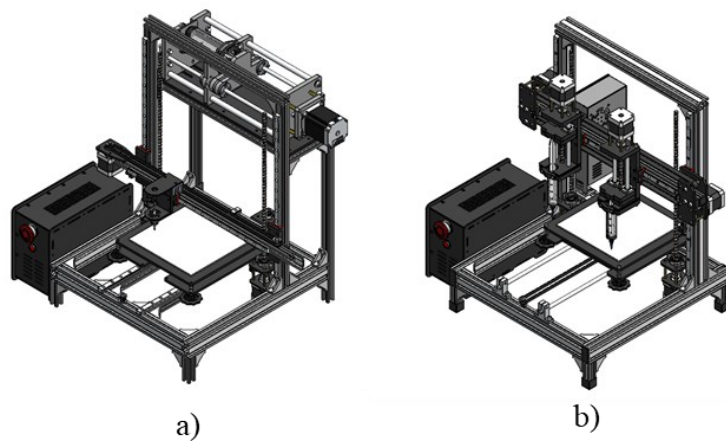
Designed of the 3D printer with. (a) Indirect extrusion; (b) direct extrusion.
